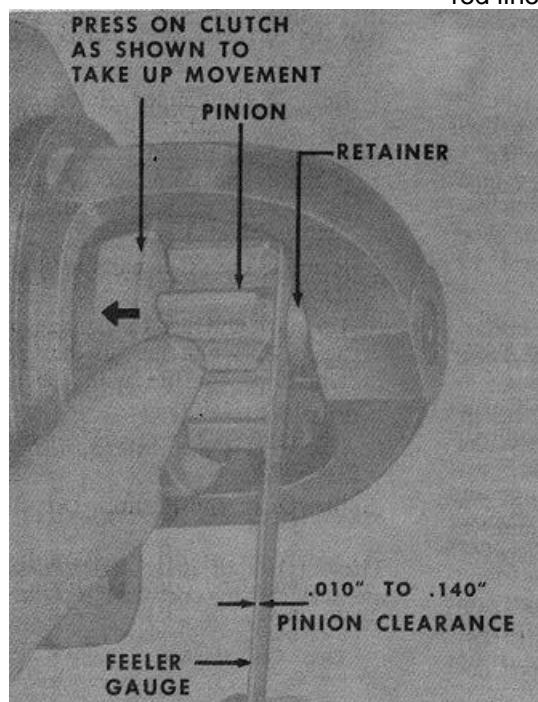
Checking pinion clearance on intermediate duty clutch motor.
